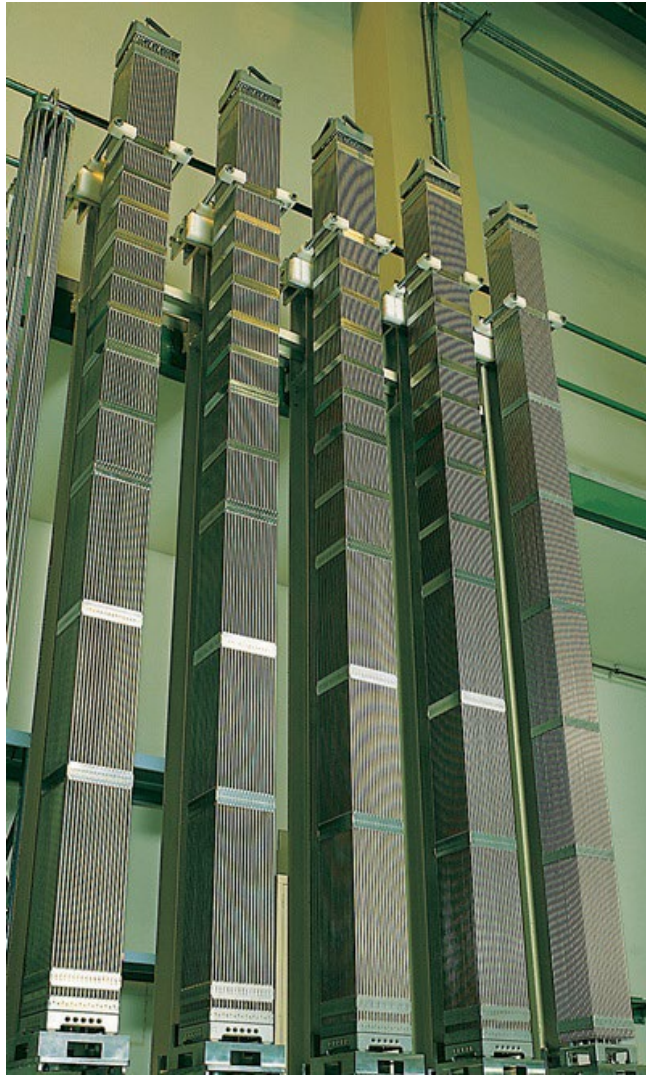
Manufactured PWR fuel assemblies at KEPCO
